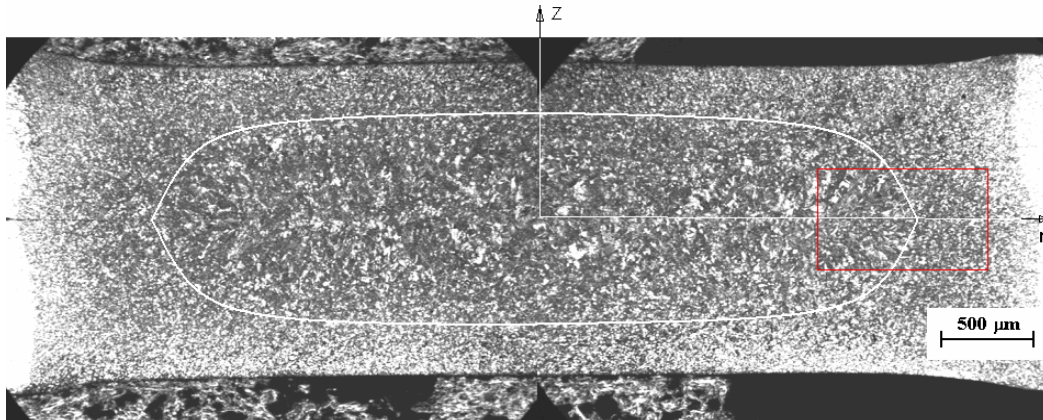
(a) Cross sectional view of the actual spot-weld, the nugget shape is shown by the white boundary
